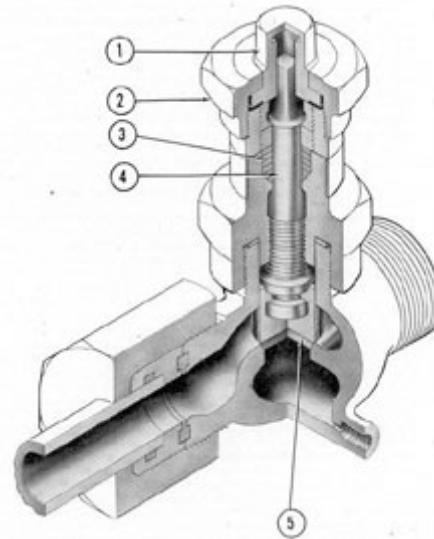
Cutaway of hydraulic Silbraz valve.
